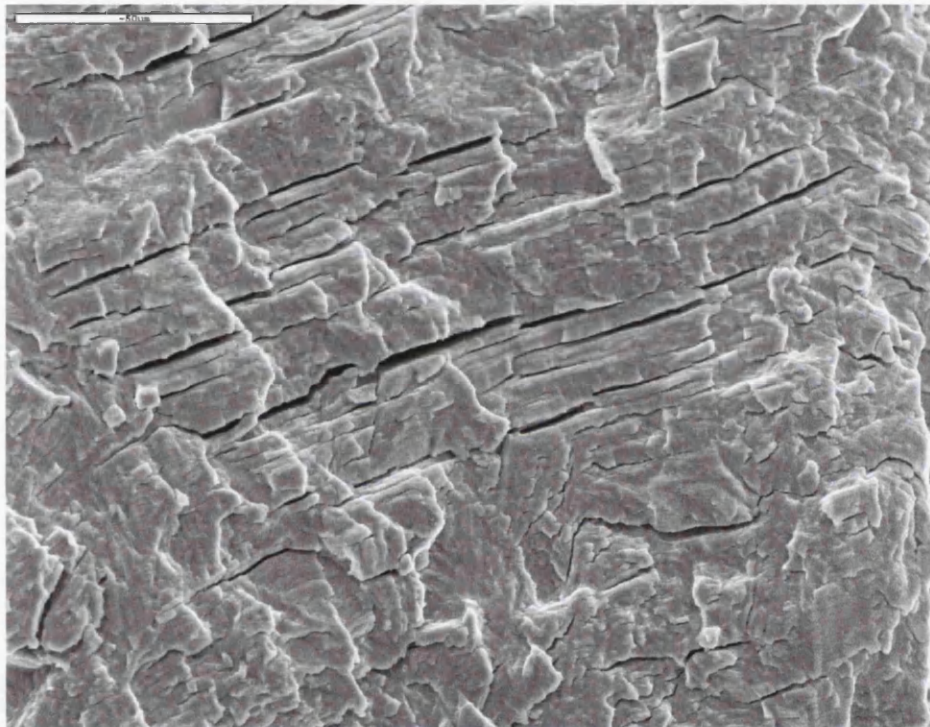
Overview of DEN fracture surface (550°C, in air, 2 min dwell), with multiple surface cracks
